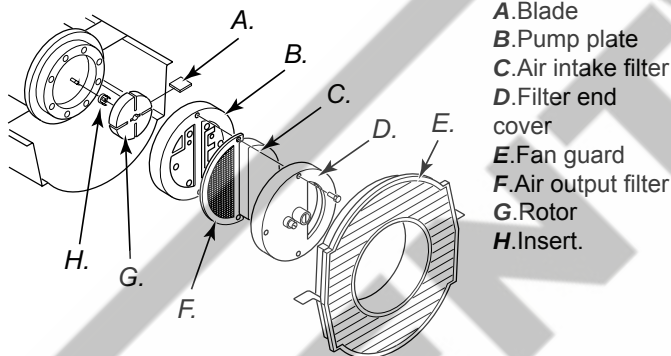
Rotor location, 35.000 btu/Hr and 70.000 Btu/Hr.
